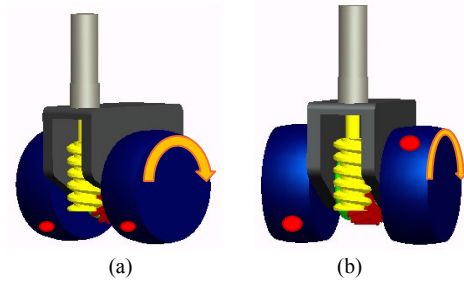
(a) Both wheels rotate in the same direction; (b) the right wheel stays still, and the left rotates, so the wheel module turns. Because this module is viewed from the front, the wheel on the left is the right wheel.
